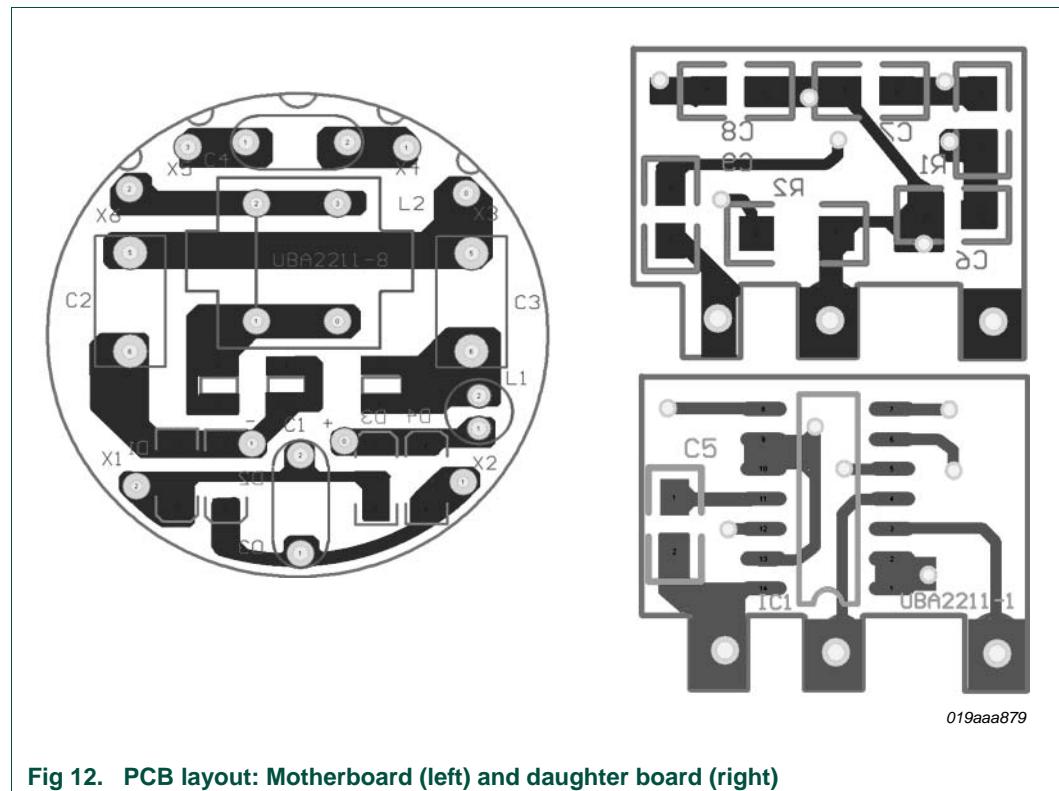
PCB layout: Motherboard (left) and daughter board (right)
